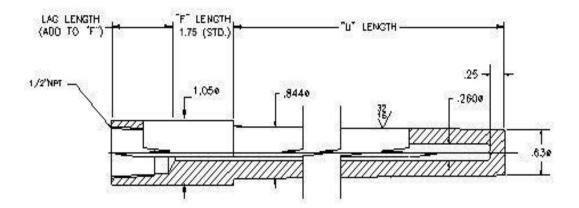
Selection M (3/4" NPS Socket Weld Process Connection)
